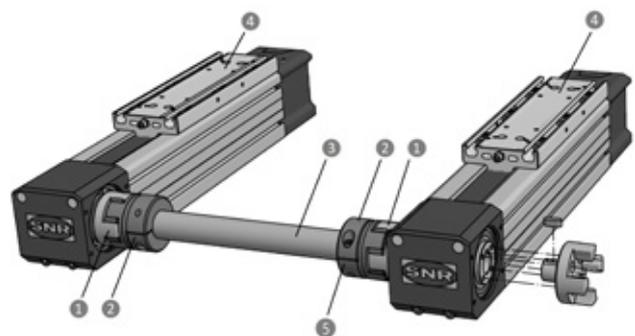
Mounting of parallel linear axis with connecting shaft
